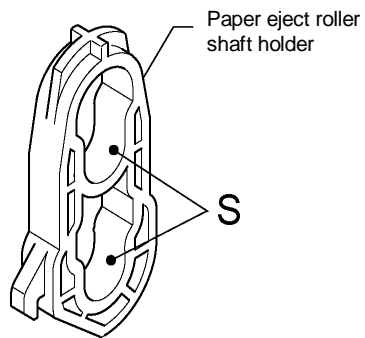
Sliding Surfaces of Paper Eject Roller Shaft Holder Shafts
